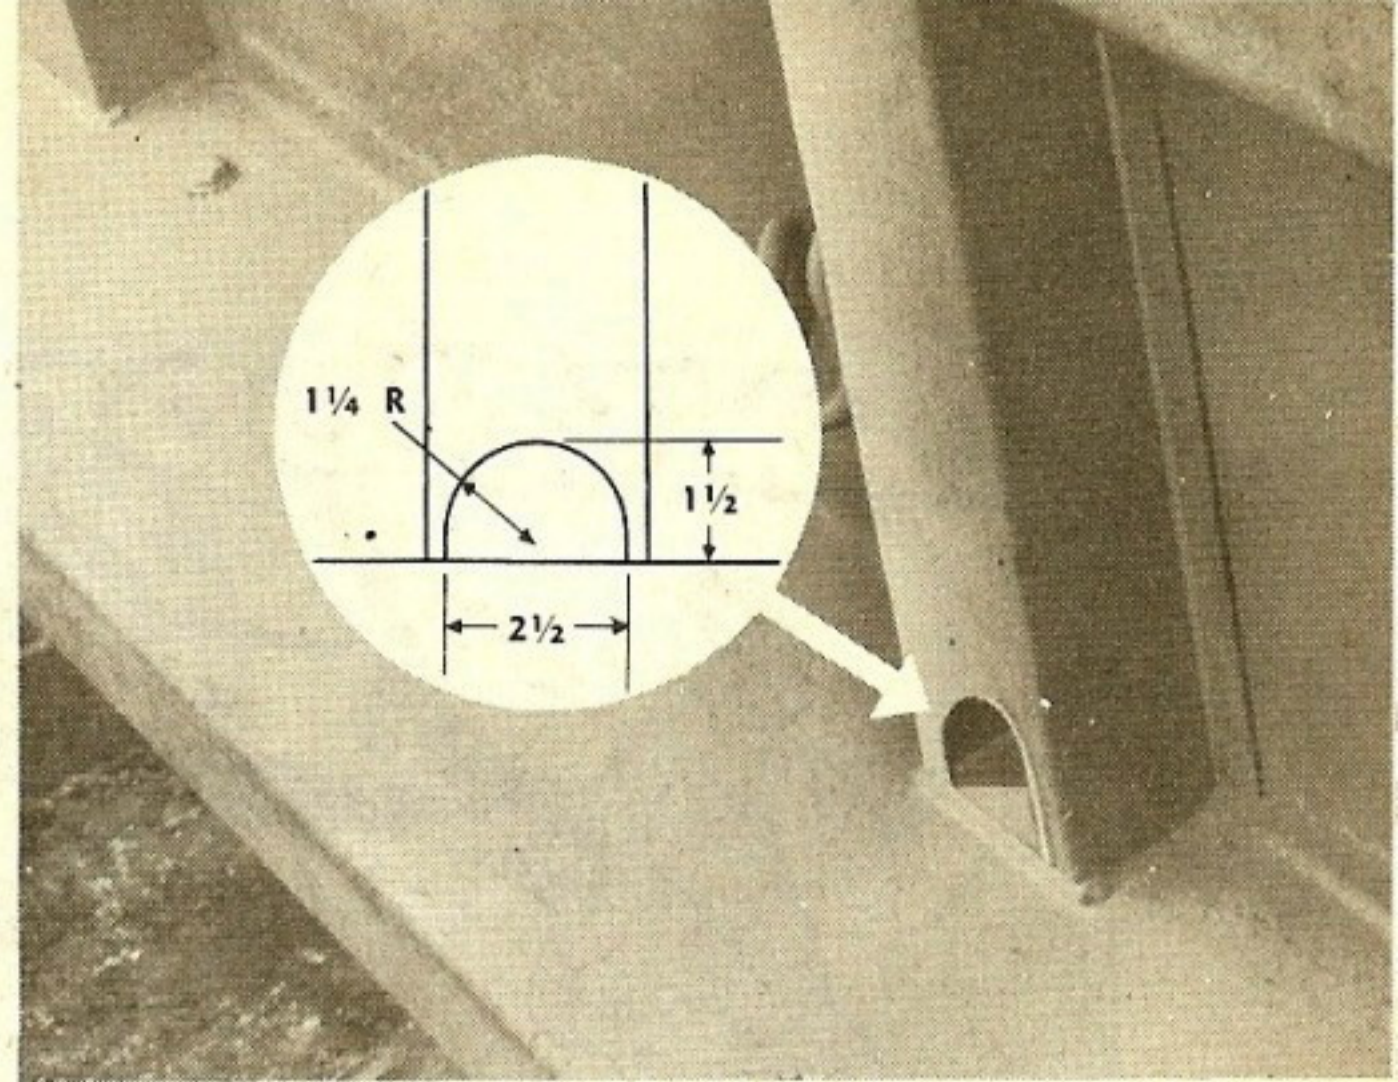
Cut this hole in front of all-steel body pockets for better drainage and cleaning.
